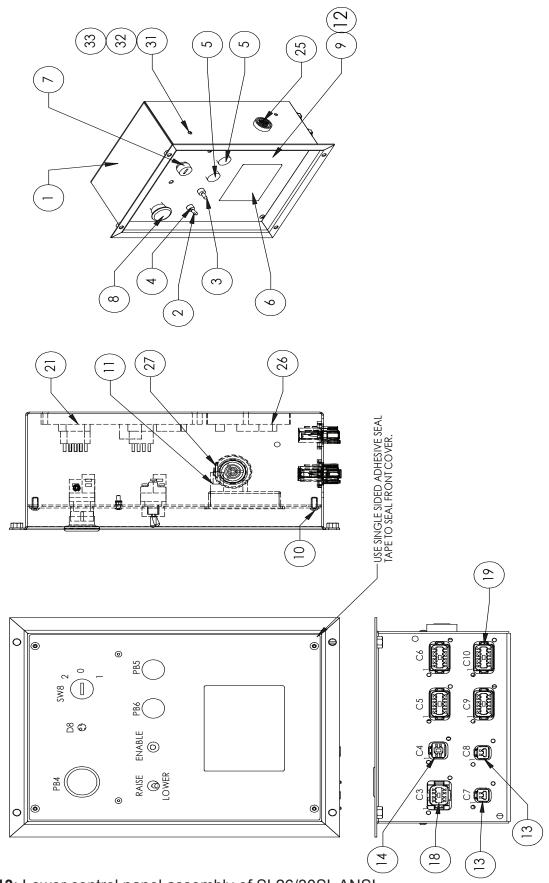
Lower control panel assembly of SL26/30SL ANSI
